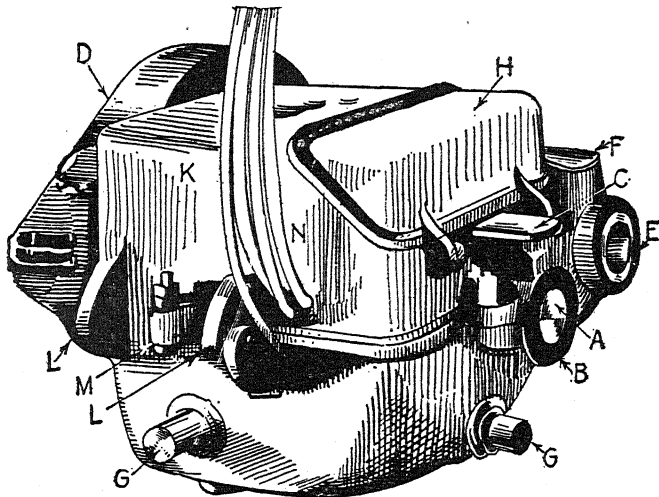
,069.—Direct current railway motor, casing closed. *As shown*, the armature shaft A, projects through its bearing B, lubricated by the grease box C, and is connected with the car axle by gear wheels enclosed in the gear cover D. The gears serve to reduce the speed of the car, and also to increase the effective pull of the motor. The car axle passes through the bearing E, lubricated by the grease box F. The motor is supported on the truck by the lugs G G. The commutator door H gives access to the brushes, while a more complete inspection of the working parts may be obtained by throwing back the upper half of the casing K upon the hinges L,L, after unscrewing two bolts, one of which is shown at M. The insulated cables shown at N, pass through the casing and supply current to the motor.
